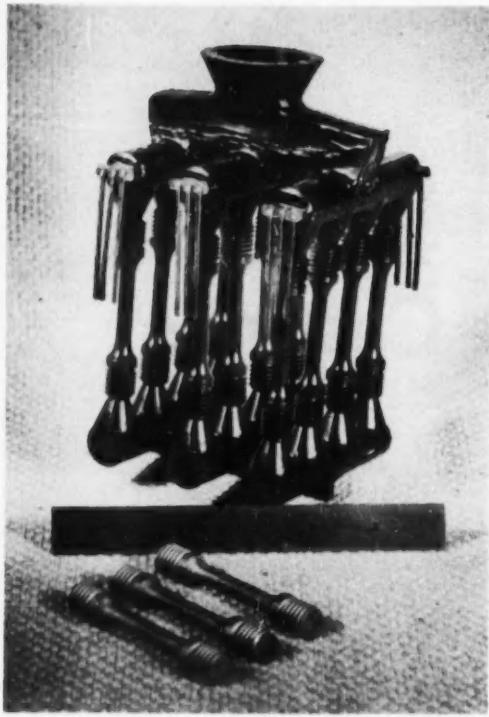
Typical pattern assembly of cast-to-size test bars. Test bars are shown in front of the 6-in. rule
